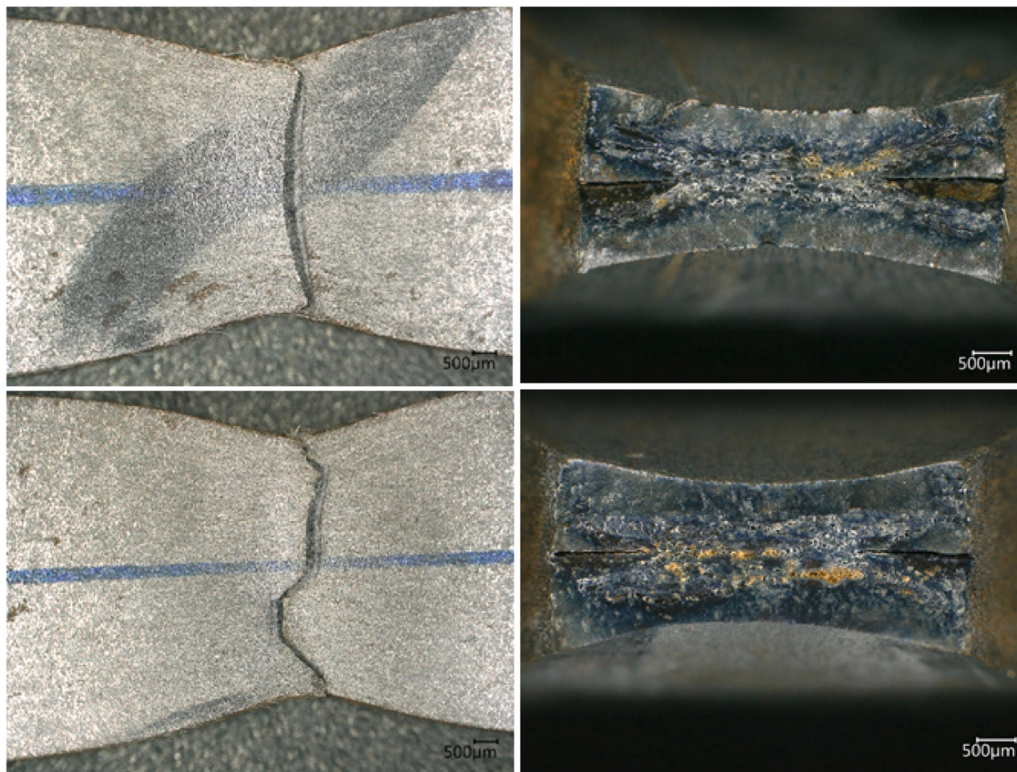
The photographs of fracture specimens of AISI 304 L.
